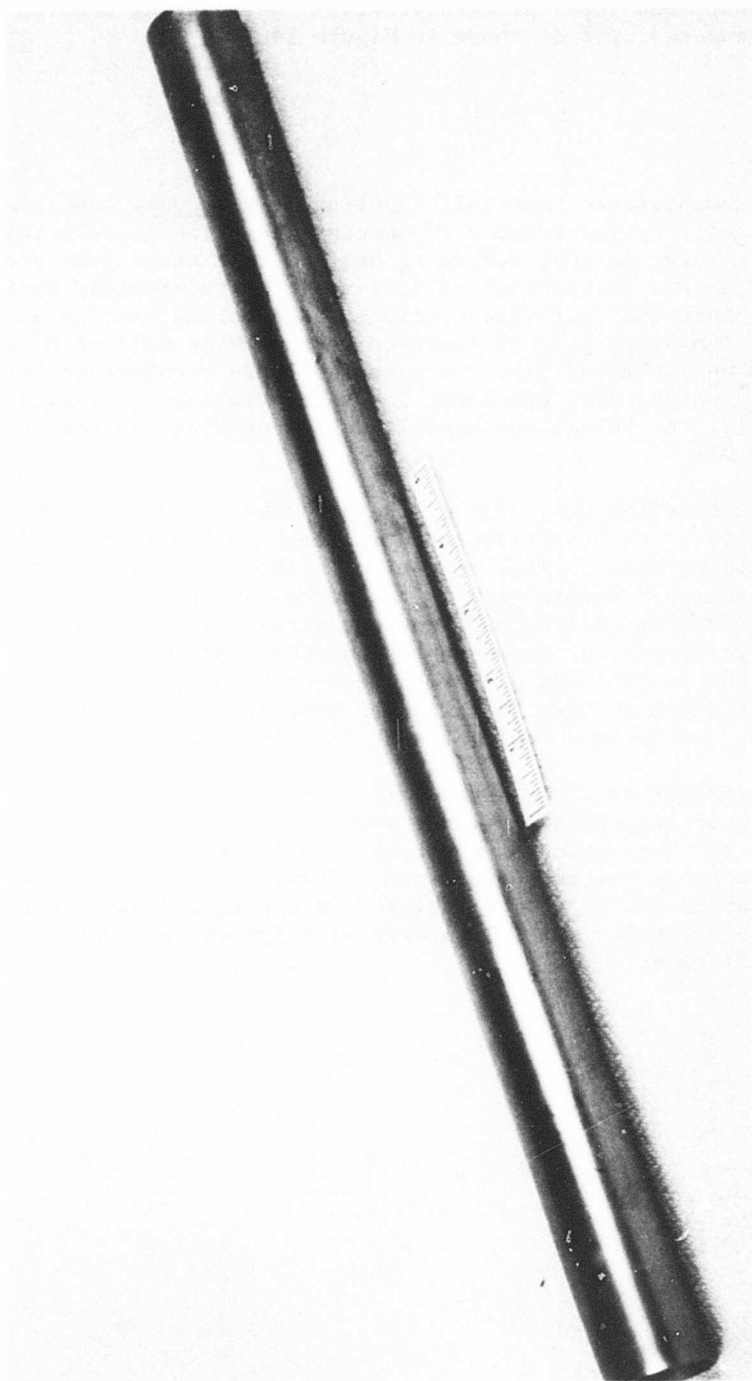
Subscale Spar Tube Tapered by Cold Drawing.
